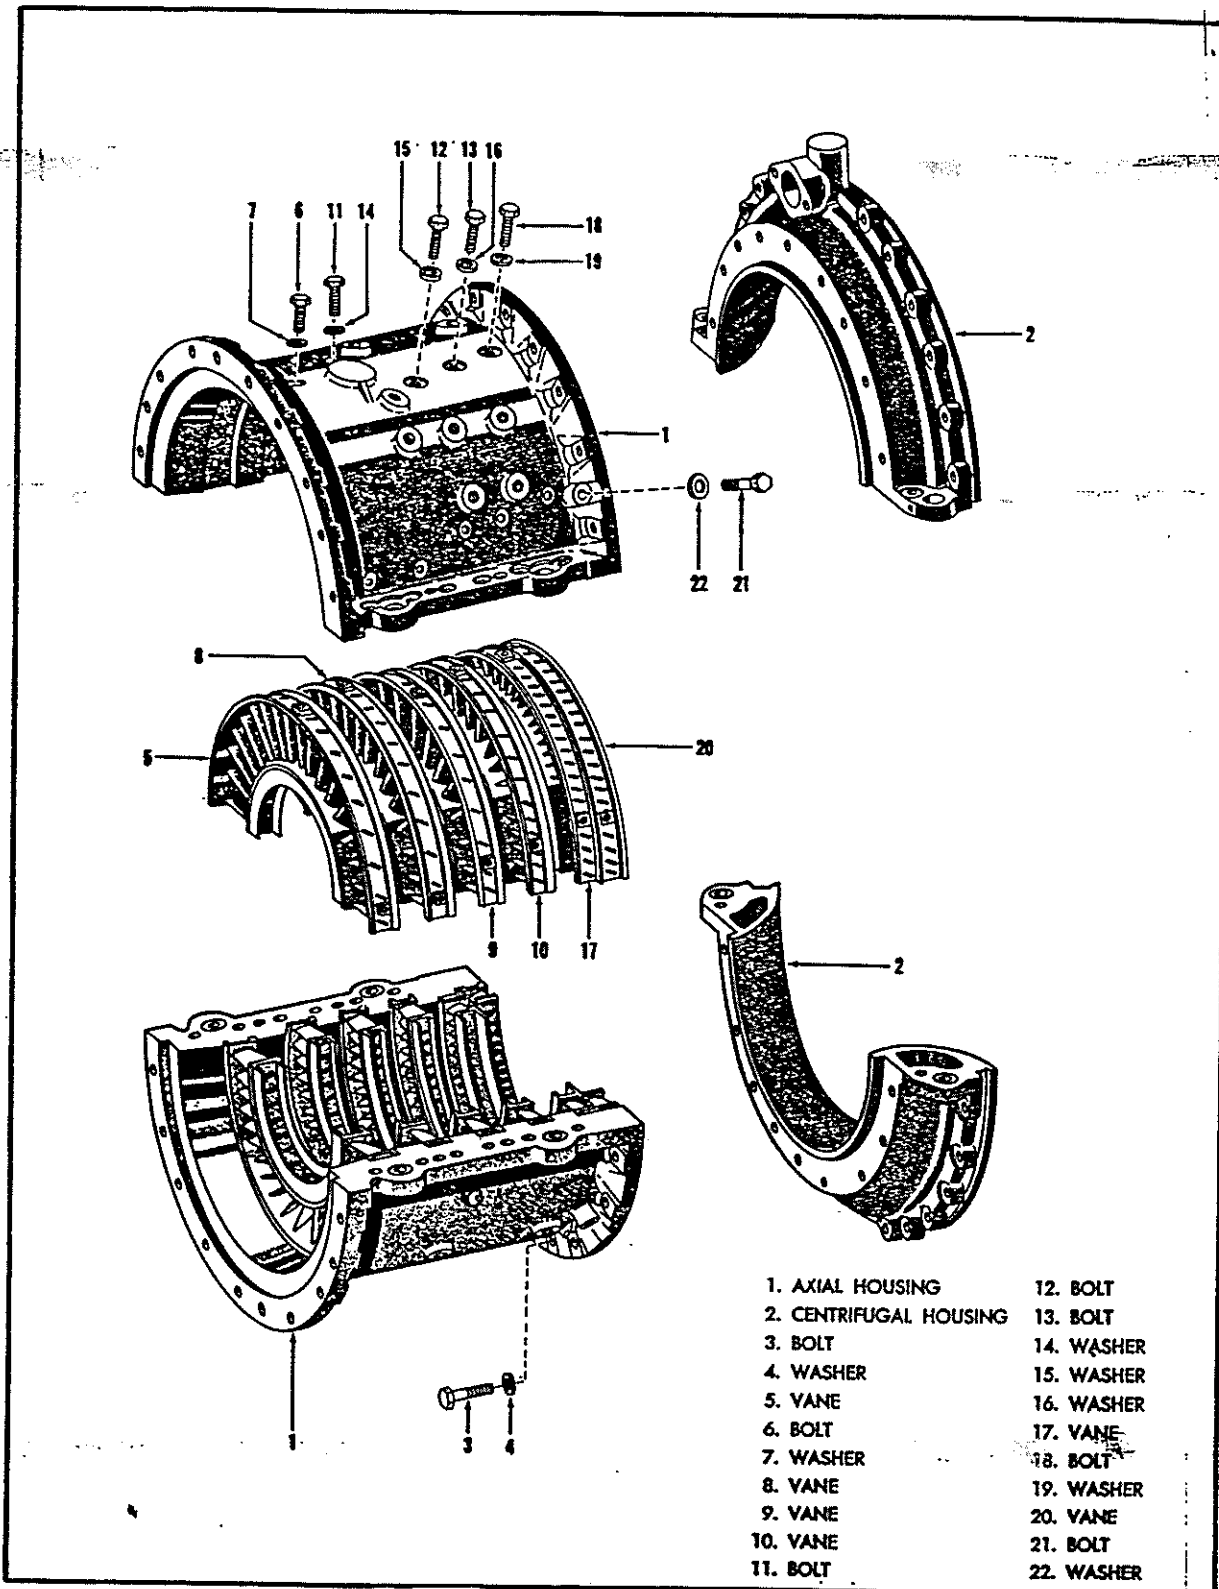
Axial and Centrifugal Compressor Housing Assemblies
